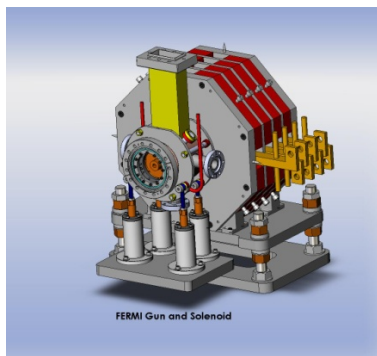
Assembly view of UCLA design for FERMI photoinjector.
